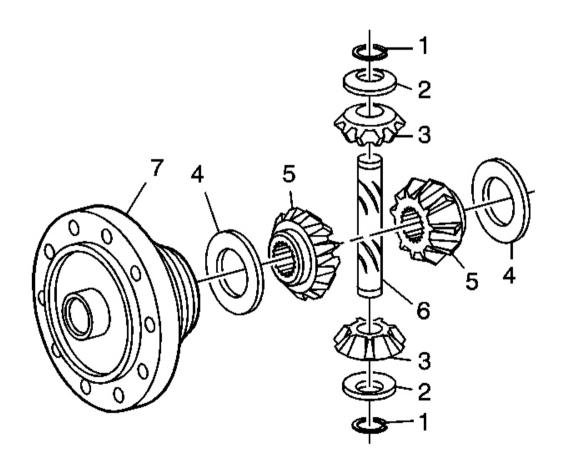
Differential Case & Components Courtesy of GENERAL MOTORS CORP.
